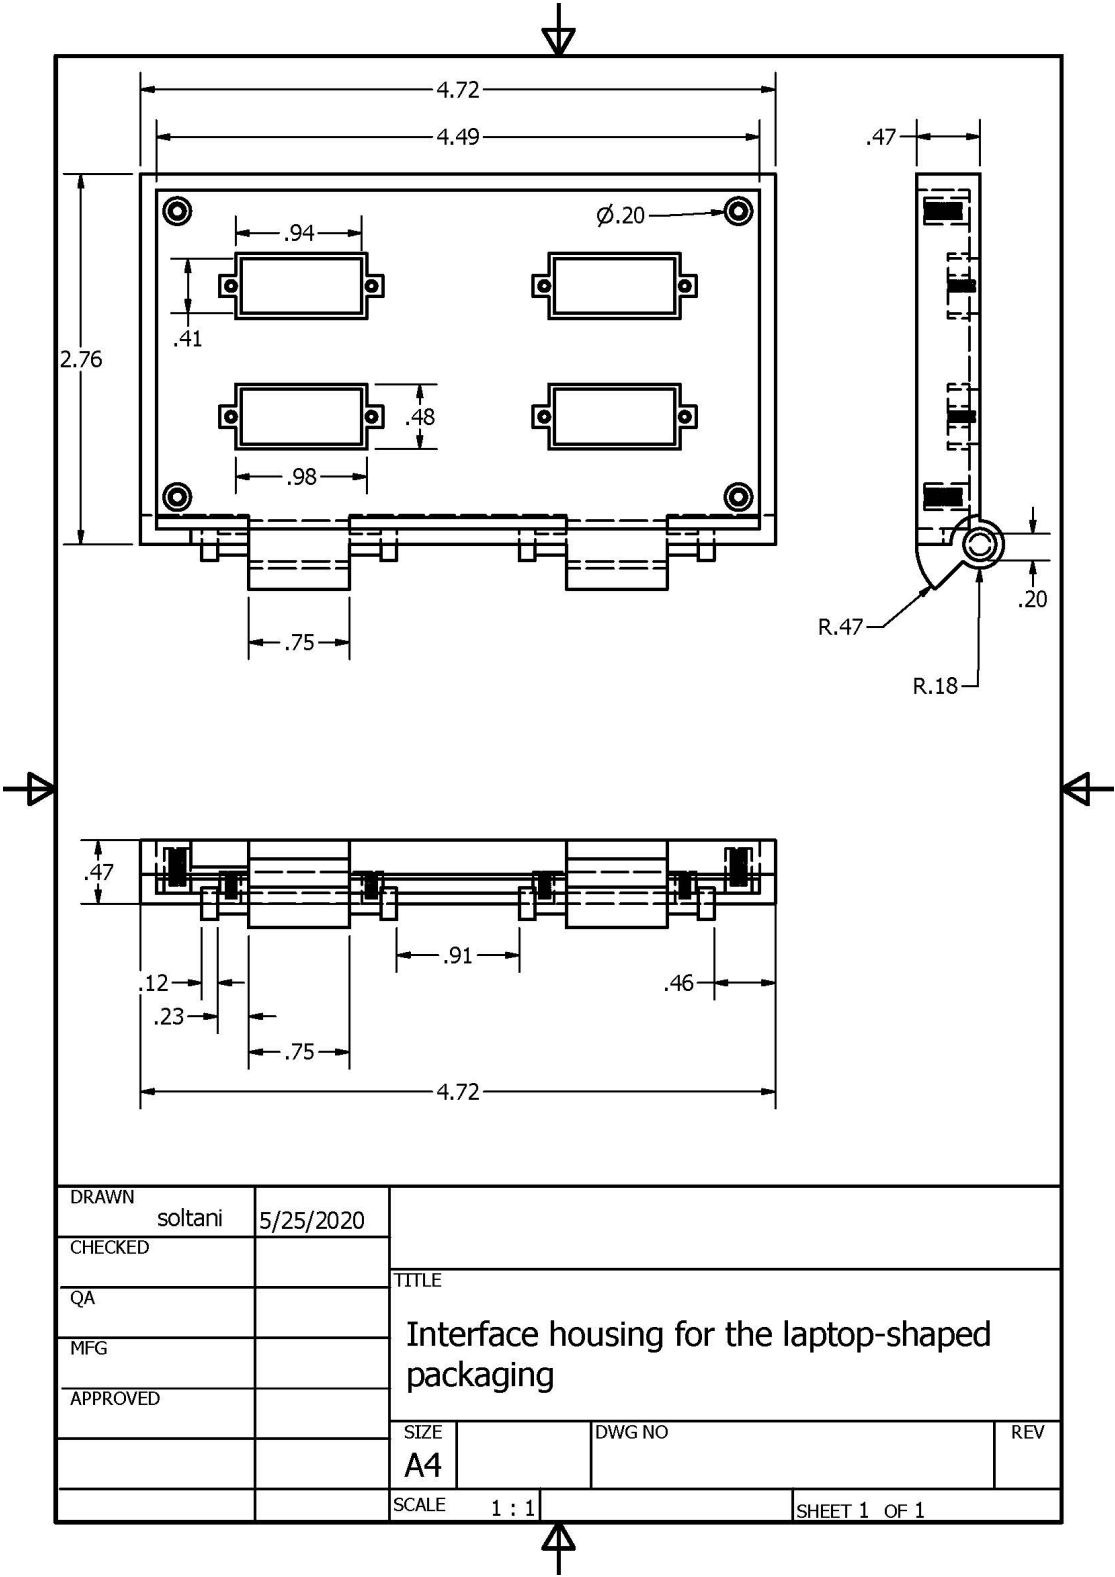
Technical drawing for the interface housing, illustrated in Fig. 3.10.
